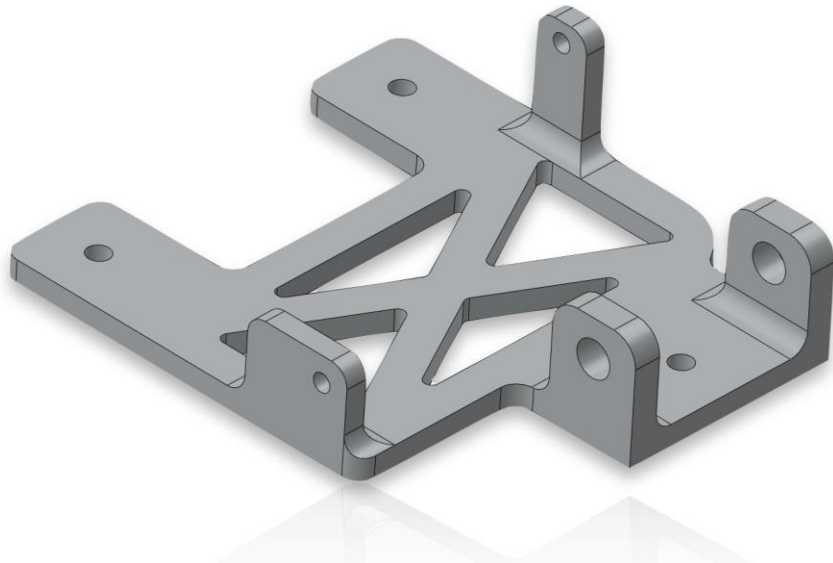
Redesigned drivetrain plate with accessible mounting holes and lightening ribs
